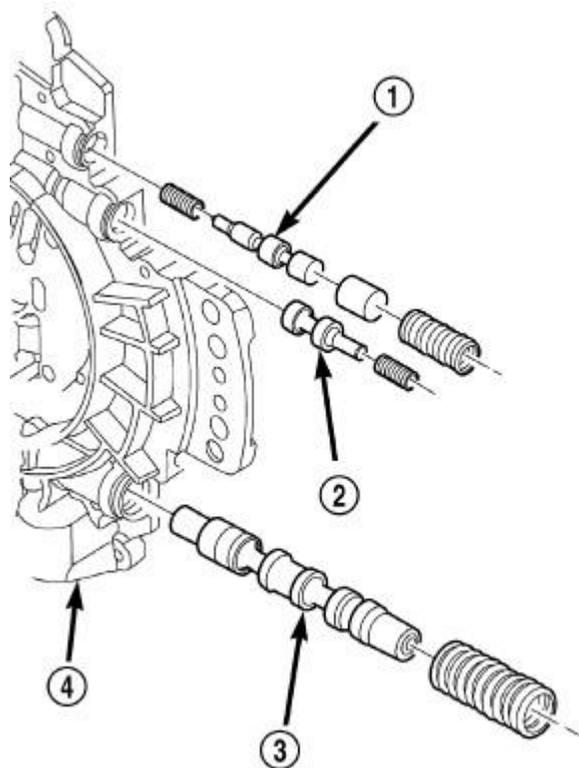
Oil Pump Valve Retainers & T/C Switch Valve
